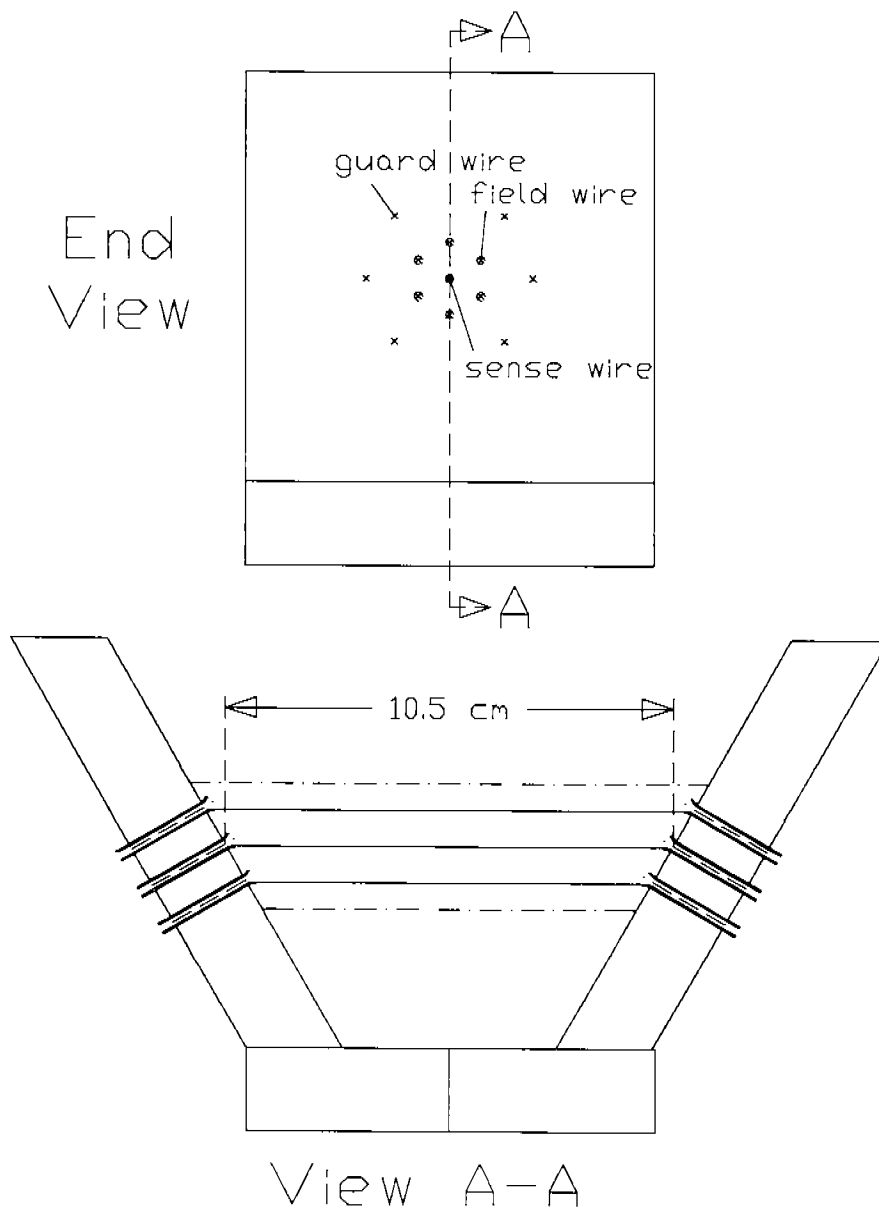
Schematic of single-cell prototype constructed with Stesalit 4411W endplates. Top view indicates wire layout as seen for the end. Bottom view shows a cross section through the center of the drift cell with wires and trumpets shown but not crimp pins. Dash-dot lines indicate guard wires.
